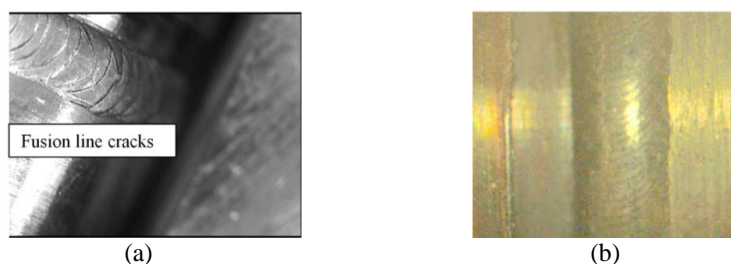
Photographs of IFAC-1-to-316LN SS end plug weld: (a) with defects and (b) defect free weld
